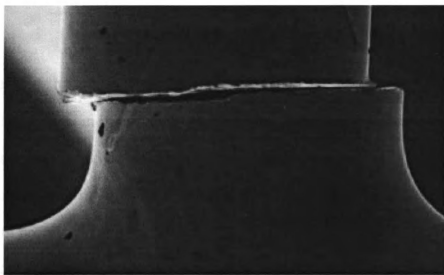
Inlet side view SEM image of the fractured outlet strut shown in Figure 3.4. Adapted from [81]
